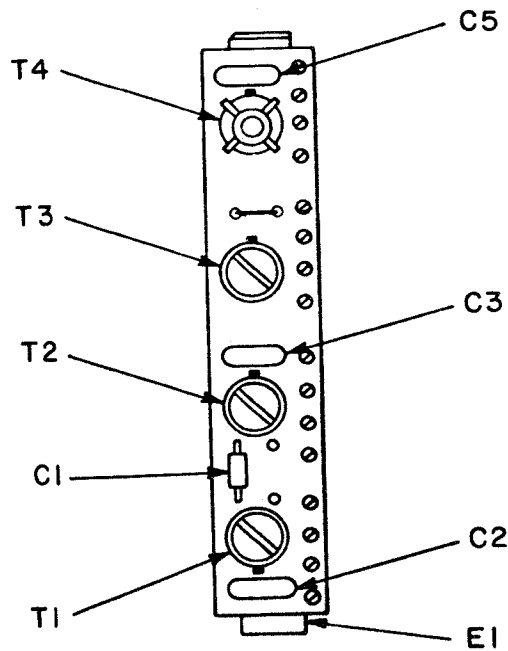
7 MHz Subassembly A2A4A25,
